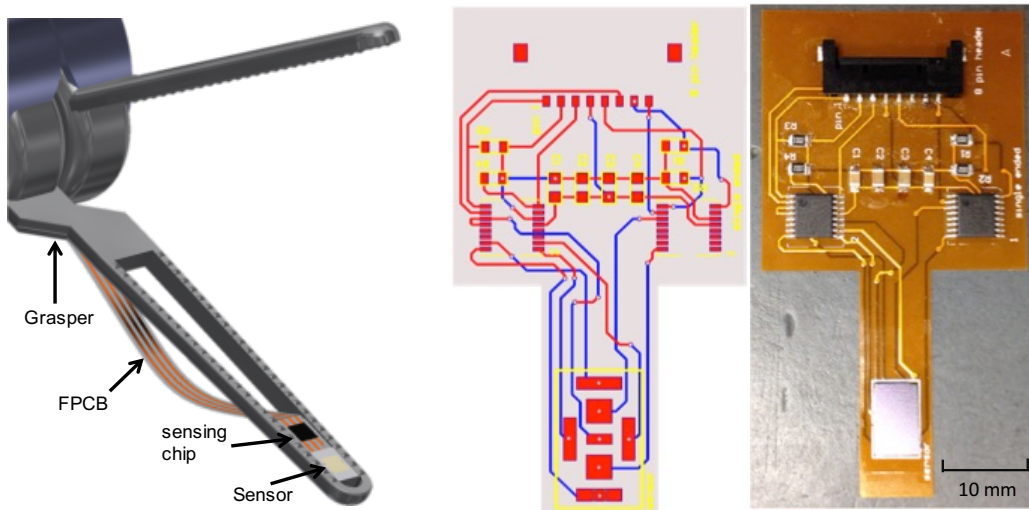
(left) PCB layout for single-sided sensor (right) real object after soldering components
